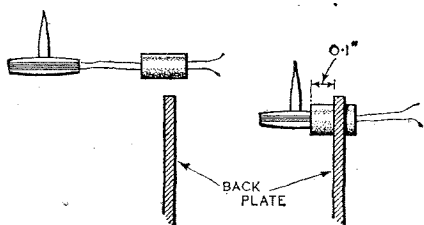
Illustrating the method of mounting the coil in the back plate.
